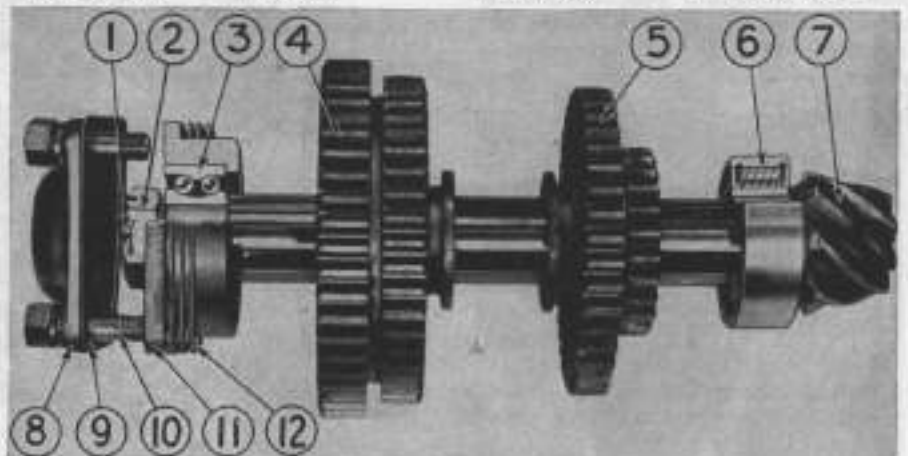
Sliding gears and shaft—Models 101, 101 JR., 101 SR., 101 Super, 102 JR., 102SR., 102G.JR. and 102G.SR.
